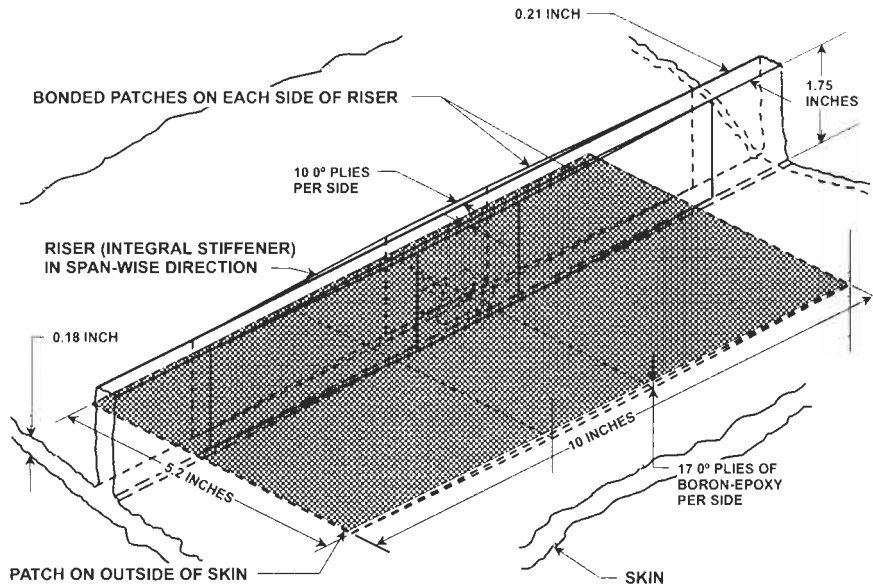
Typical design of bonded repairs for cracks in stiffened structures.
